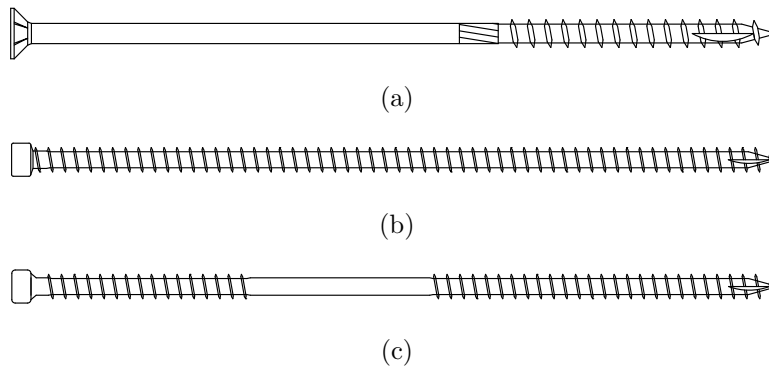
Screw type: (a) single threaded (b) fully threaded (c) double threaded.
